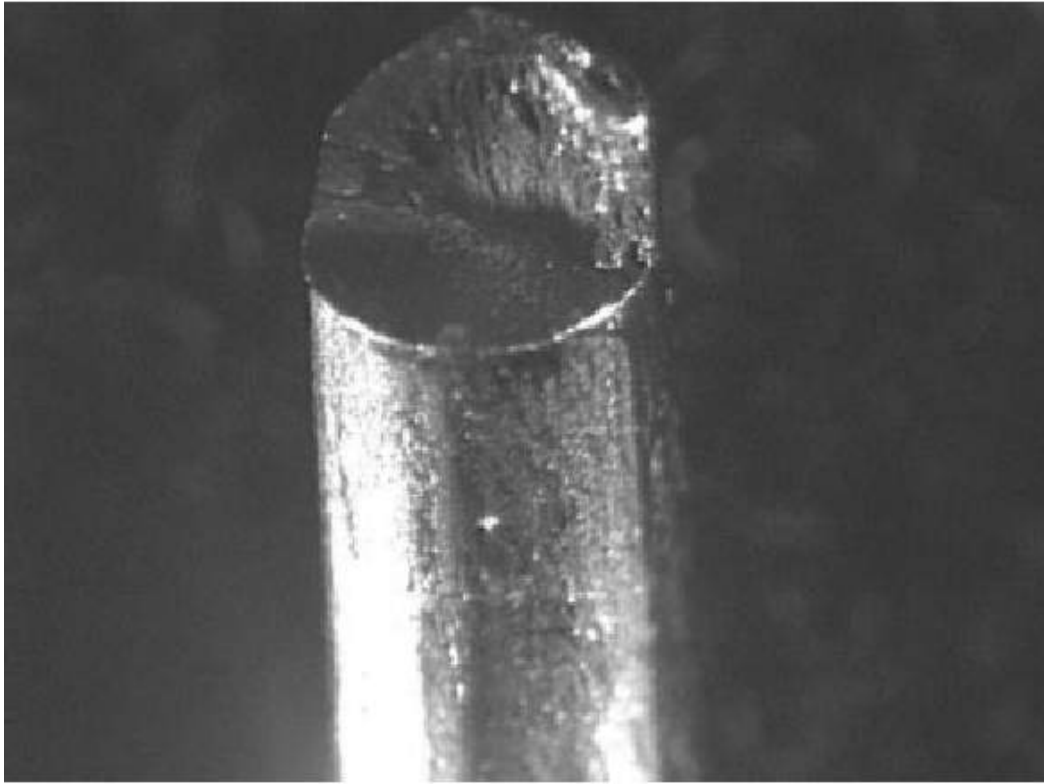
Fracture surface of a corrosion fatigue cracking [27].
